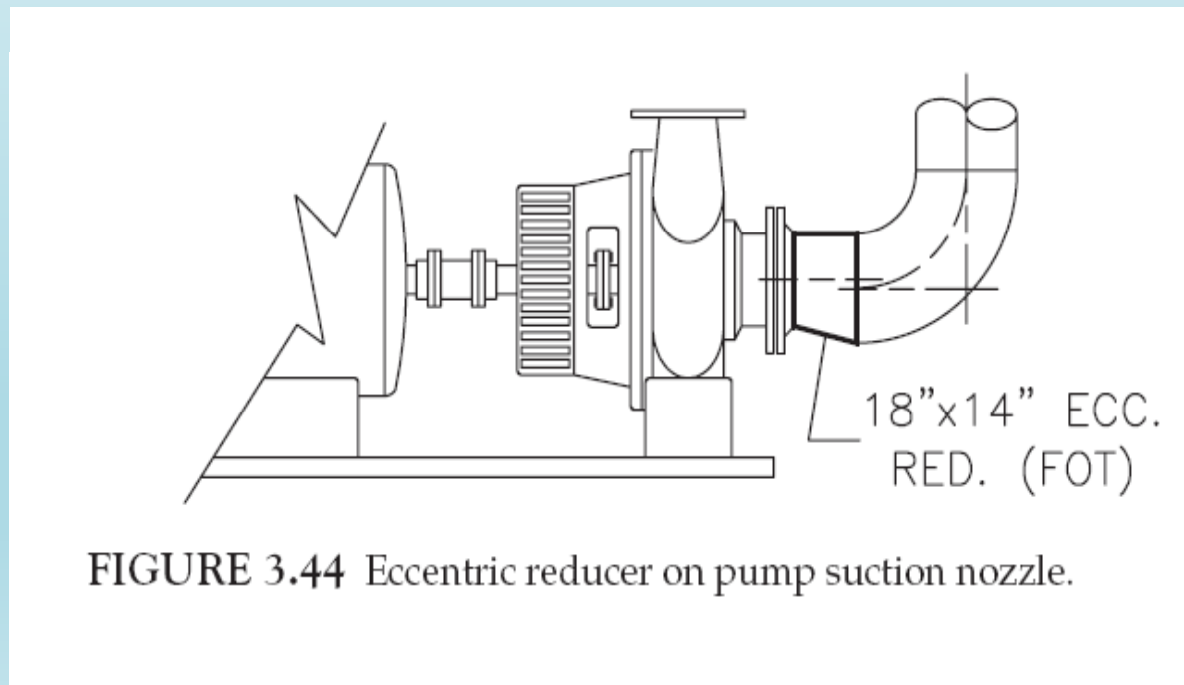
Eccentric reducer on pump suction nozzle.
